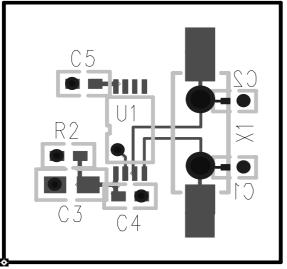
B. ICS843011 PC BOARD LAYOUT EXAMPLE
